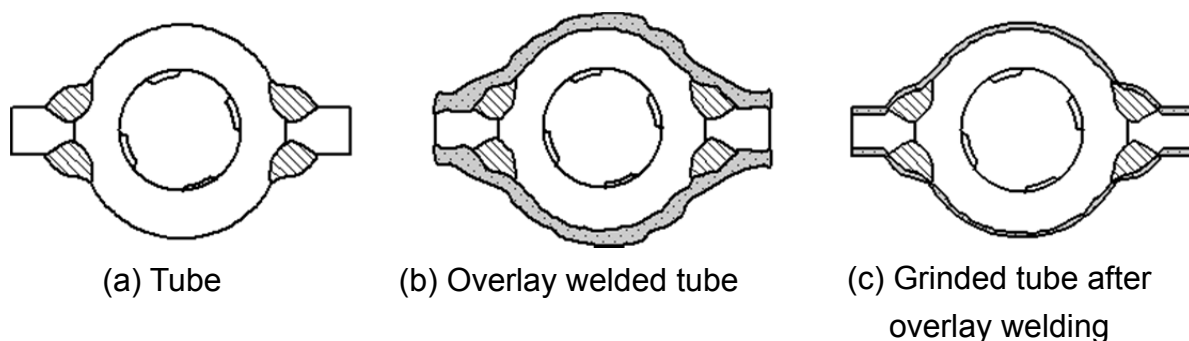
Schematic drawing of cross section of creep burst test specimens
